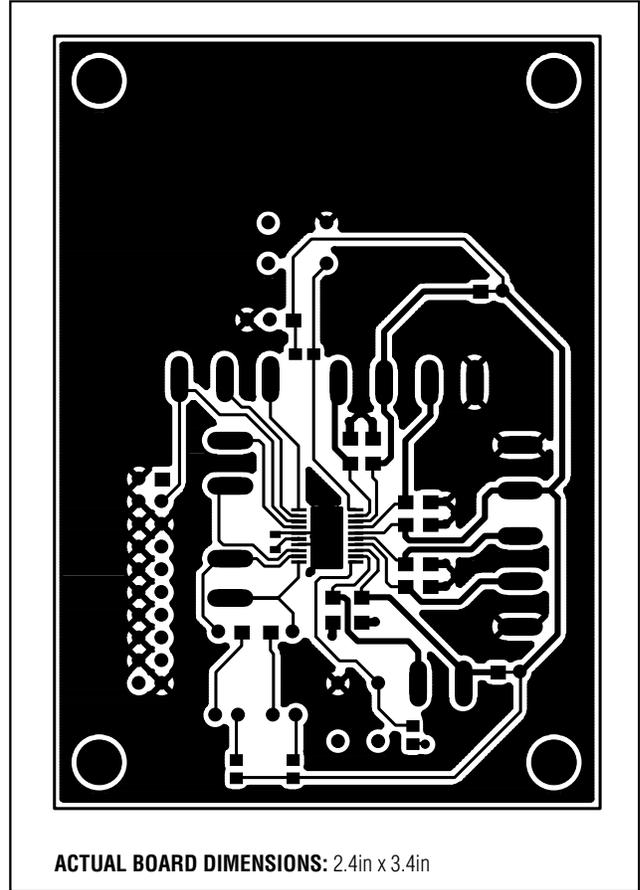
MAX1799 EV Kit PC Board Layout—Component Side
